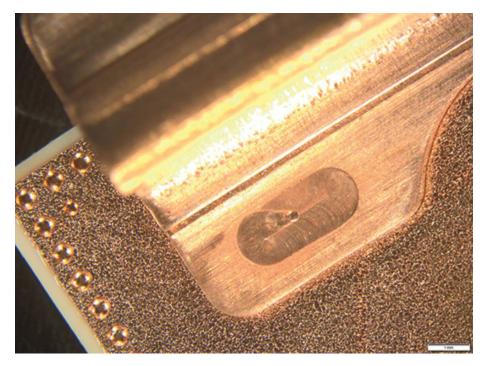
An example of a copper contact on DBC plate, welded with the TruDisk 1020 continuous-wave green laser at 0.1 s, is shown.
